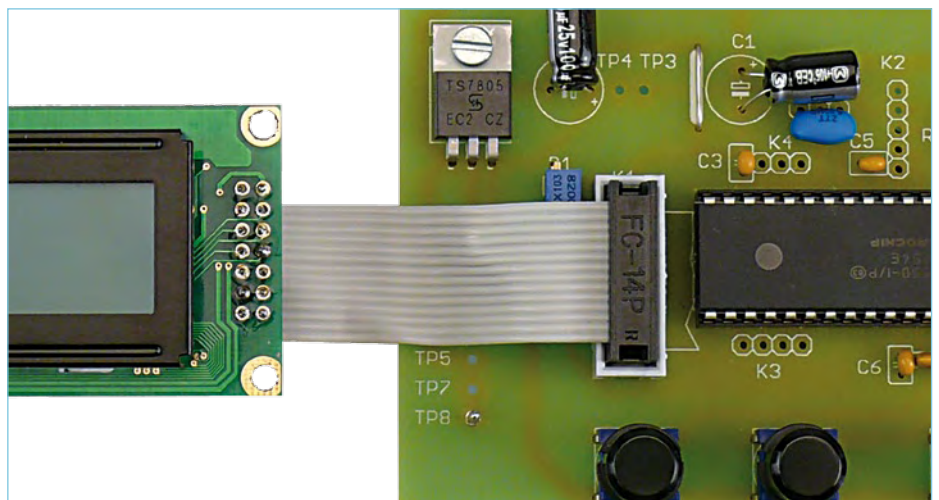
A 14-way ribbon cable connects the LCD module to the PCB.
